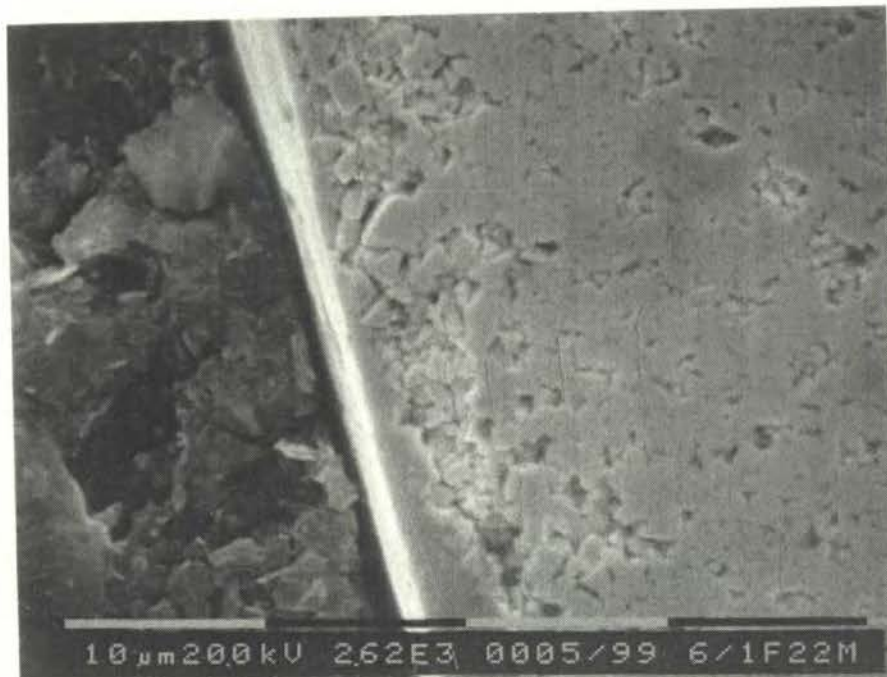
18 Workpiece material adhesion and associated cracking on the flank face of KC994M tool after cutting Inconel 718 for 22 minutes at 25 m/min and 0.14 mm/tooth.
